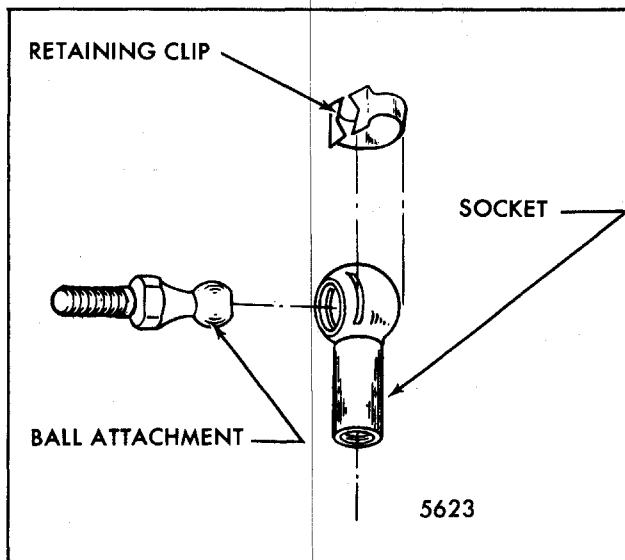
Support Assembly Retaining Clip - "H-07, 77" and "X-17" styles
